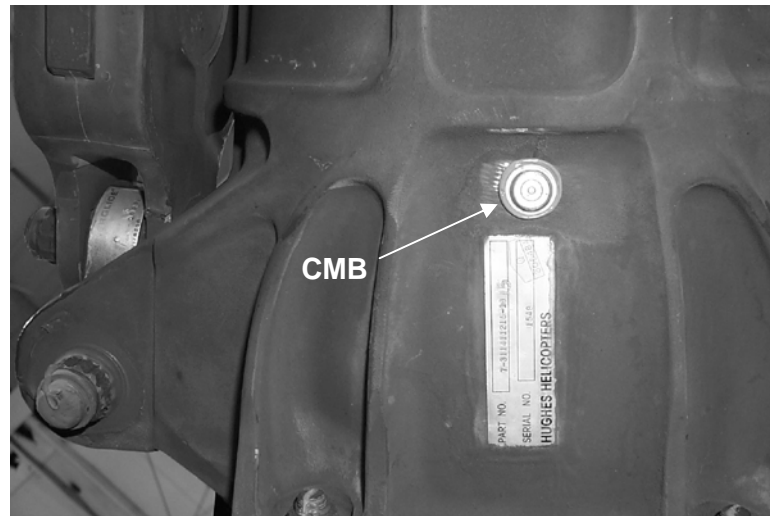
Pitch Housing (AH-64A/D) with CMB Installed
